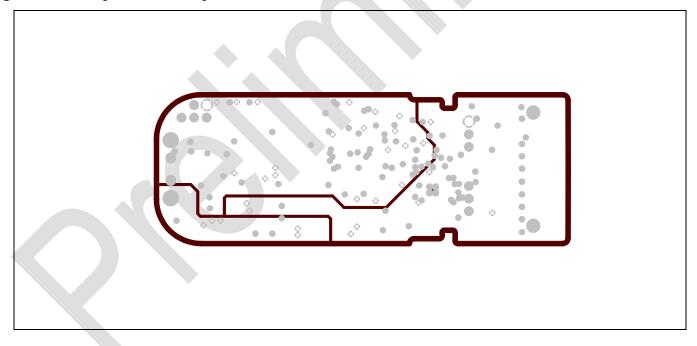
Layout Top Layer ZIOL2401 Starter Kit Extension Board
